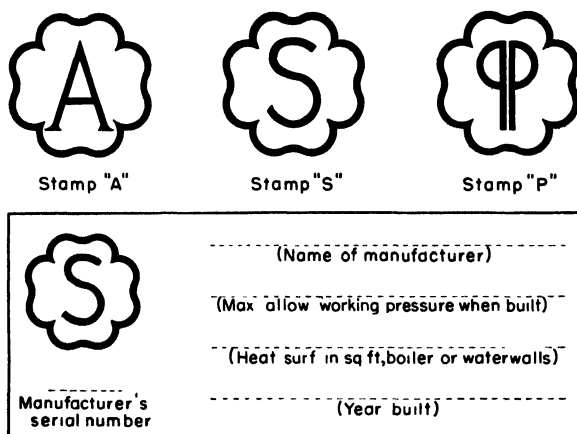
Official American Society of Mechanical Engineers (ASME) identification symbols. Stamp "A" denotes the ASME standard for assembly; Stamp "S" denotes the general ASME standard of compliance; Stamp "P" denotes the ASME standard for welded piping.
